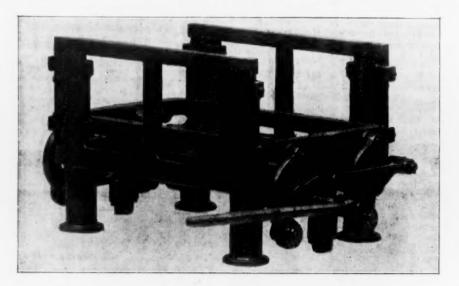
Bare Machine with Parts in Position they Occupy when Patterns are Drawn.
